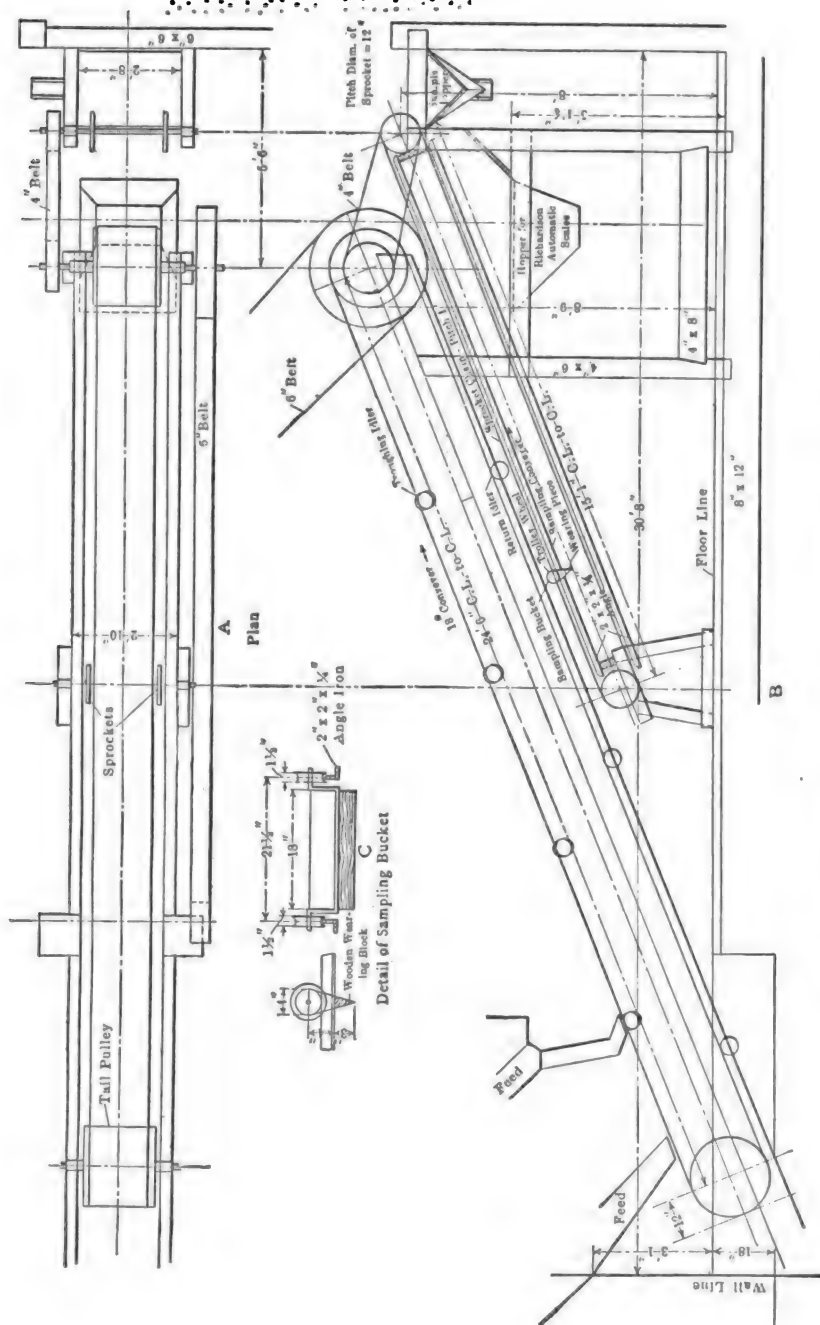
CONSTRUCTIONAL DETAILS AND METHOD OF SETTING UP VAN MATER SAMPLER.
